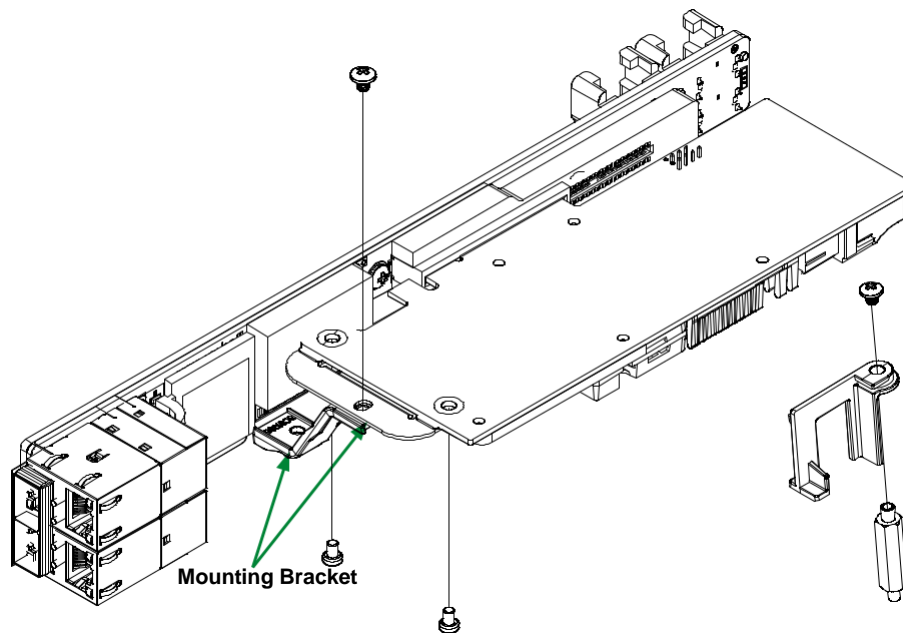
Bracket for Mounting an Internal Expansion Card on the Ultra Riser Card
